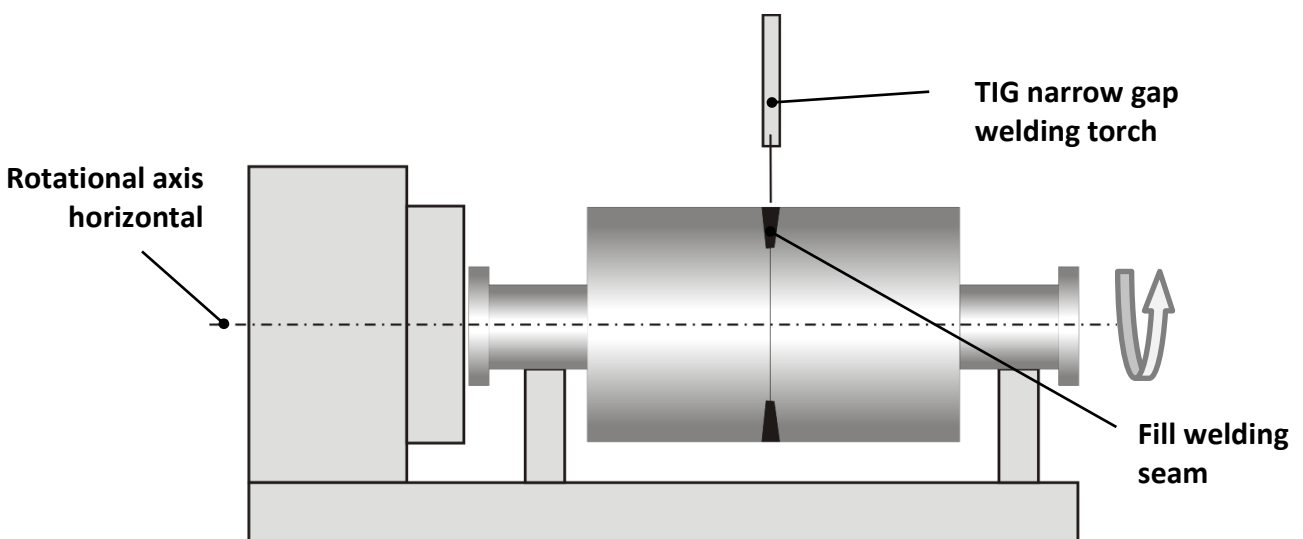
Fill welding scheme - H-H/TIG-TIG
